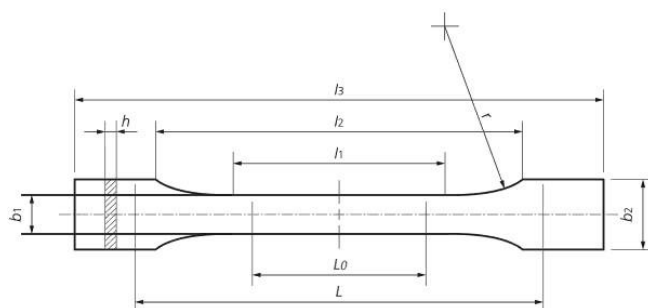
ASTM D638 Type I Tensile Test Mold [19]
